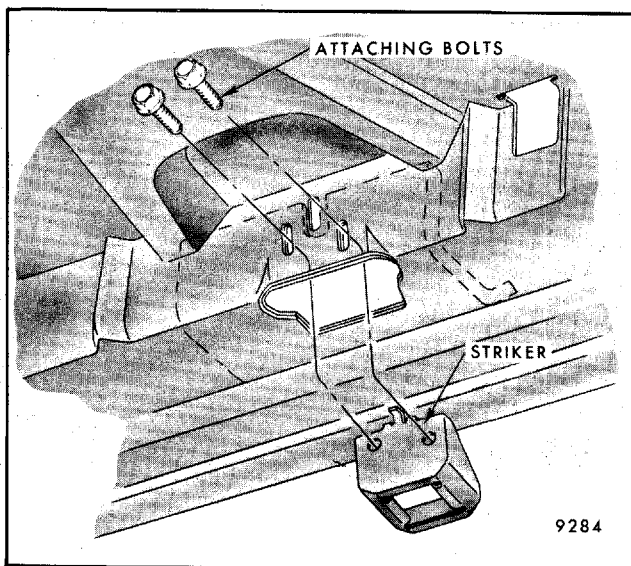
Typical Rear Compartment Lock Striker Mounted in Lid
